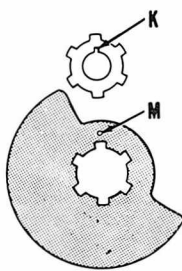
Mark (M) on rotary valves should be aligned with keyway (K) on the drive collars.
